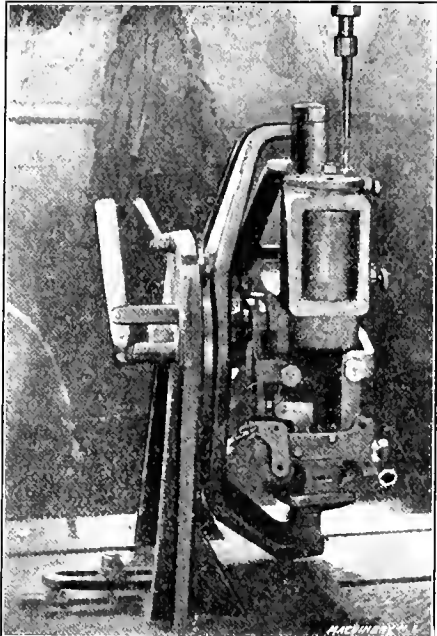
Casting in Position for Drilling Cylinder Stud Holes
